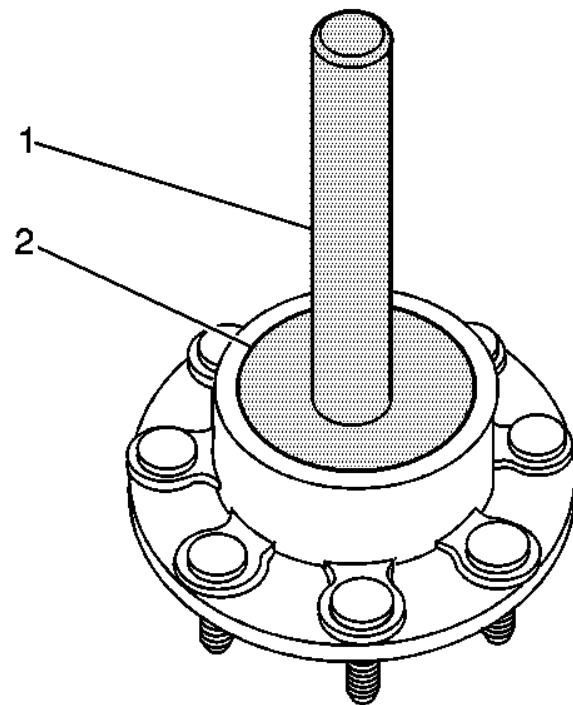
Driving Inner Bearing Cup Into Wheel Hub
